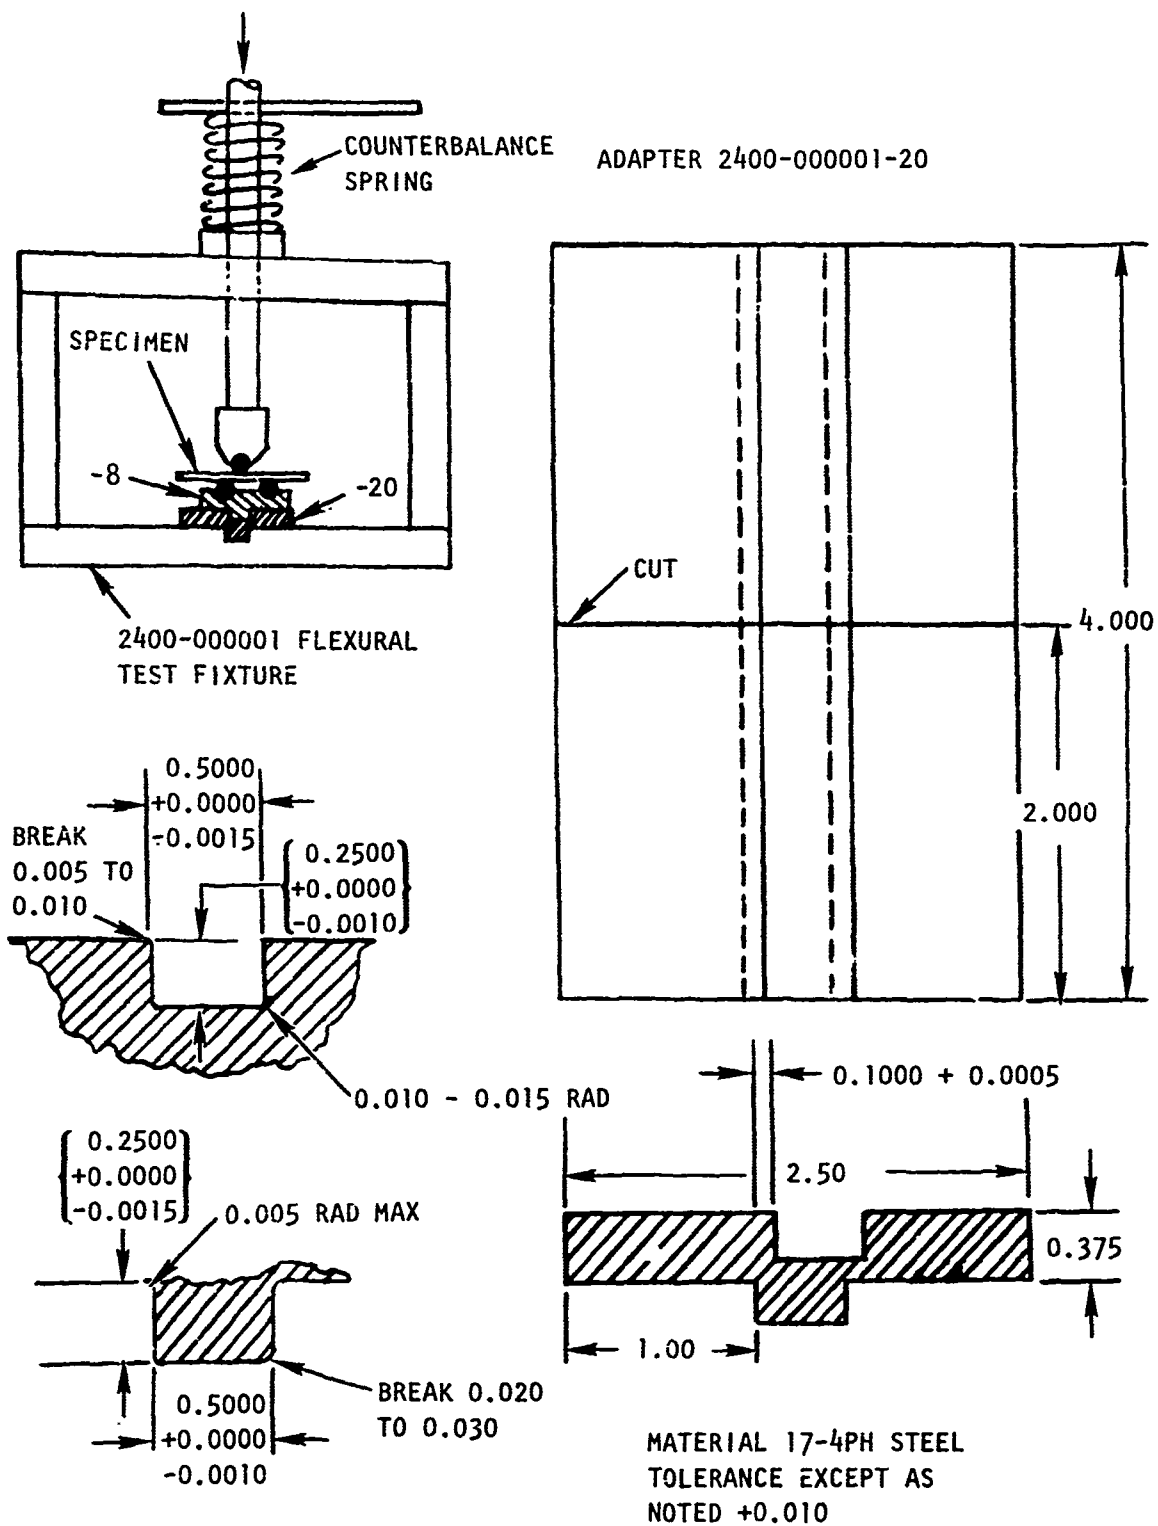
Test Fixture Adapter for Offset Interlaminar Shear Test
